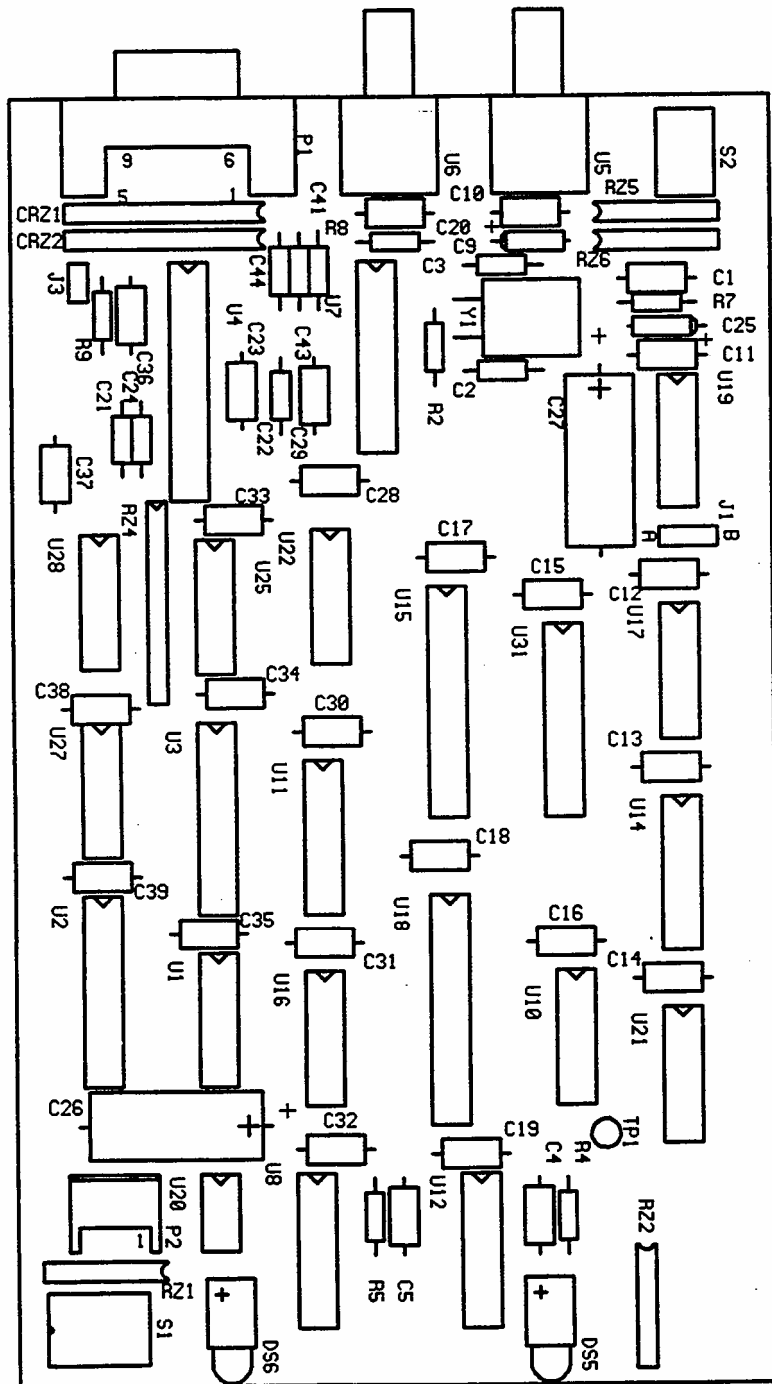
Component locator drawing, fiber optic remote module transceiver board
